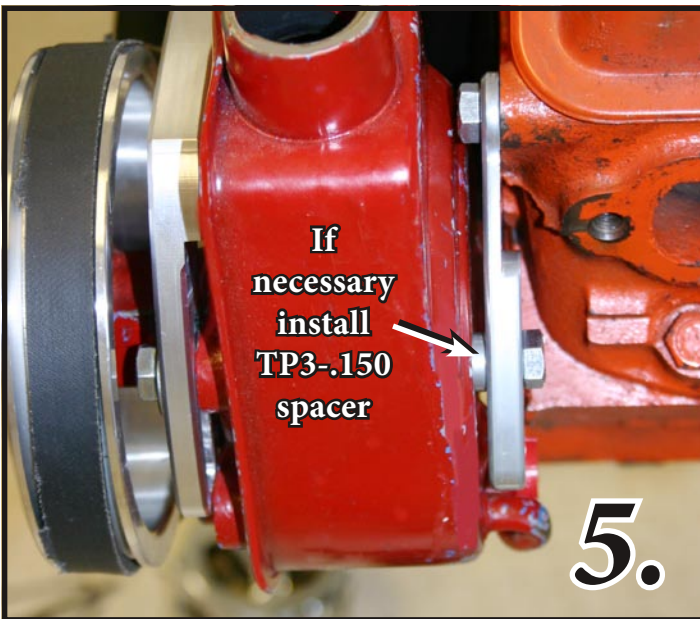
Install the Rear Support Bracket (22026-C) to the outer head bolt using (1) $\frac{3}{8}$ - 16 x $\frac{1}{2}$ " Hex Head Bolt (S308)
